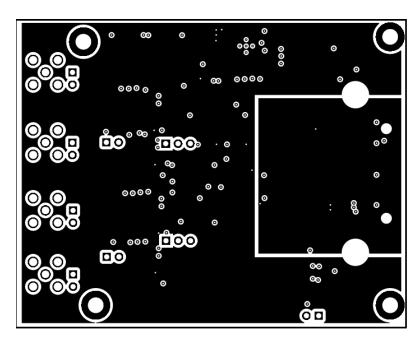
ADS8353-Q1EVM PCB Layer 3: Power Planes
